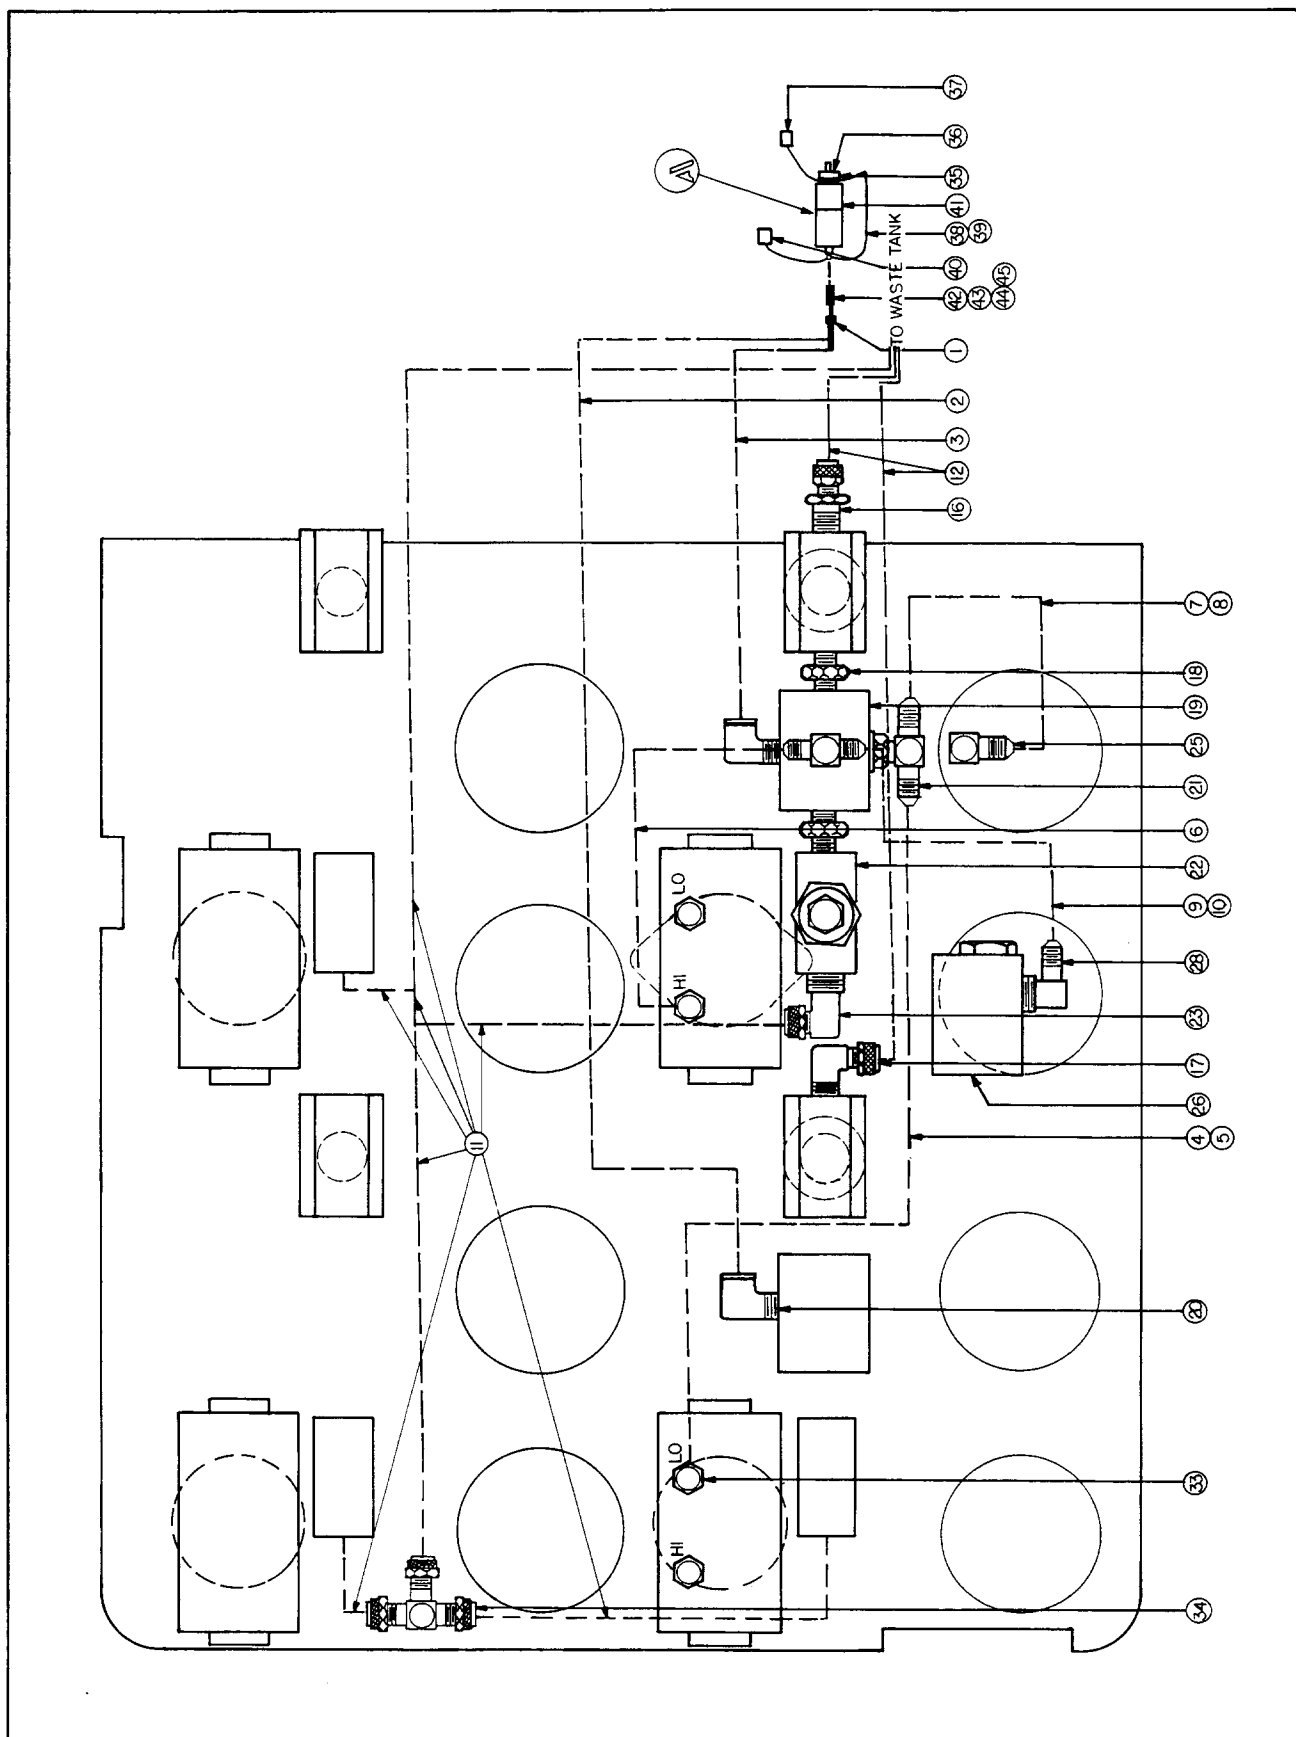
Panel Assembly (Sheet 2 of 3)
